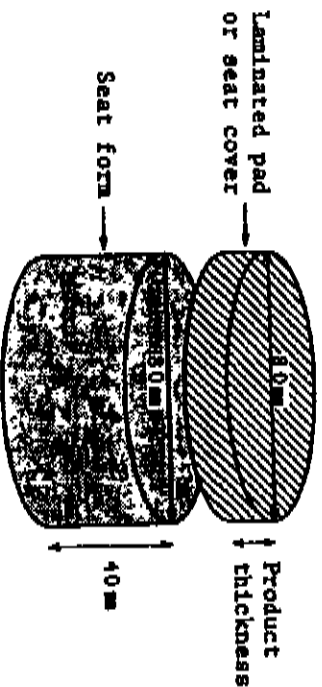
Dimensions of Test Piece for Composite Material (Seat)
